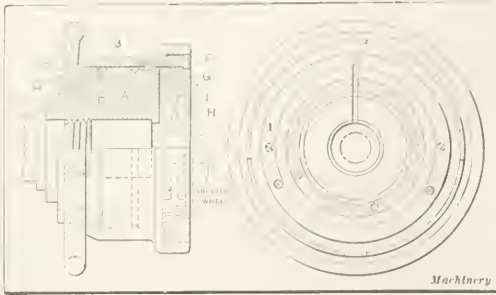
Details of Spur Gear Chuck shown in Fig. 18, designed by the Heald Machine Co.
